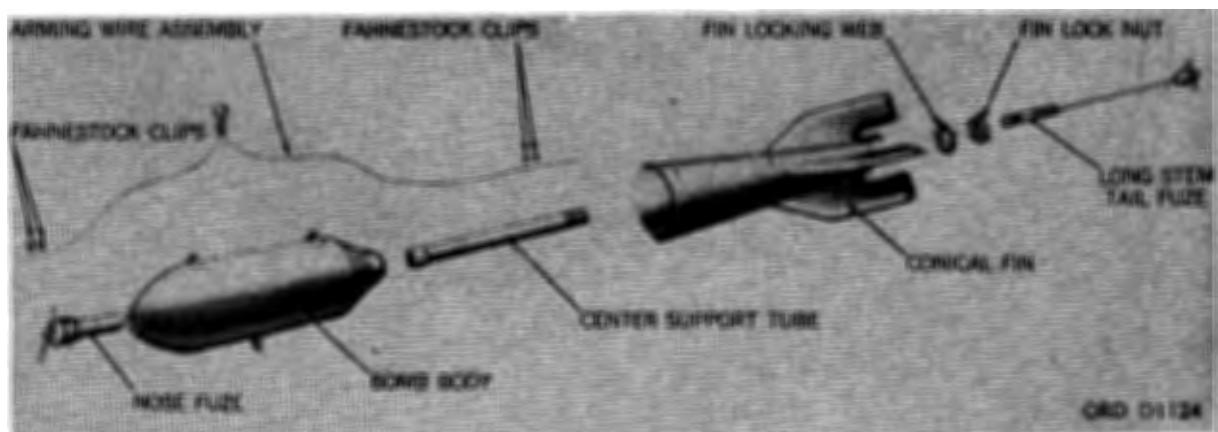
Old-series GP bomb with conical fin assembly, exploded view.
